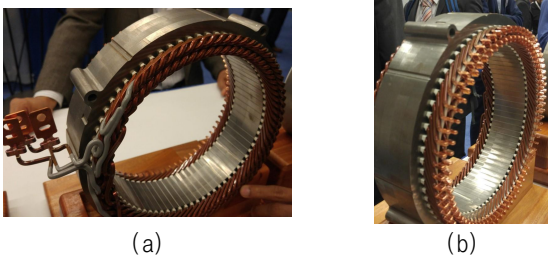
Volt stator with hair pin. (a) front side, (b) back side with welding.
